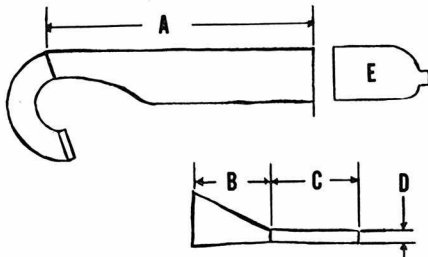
Performance of F6 Enduro models may be improved by modifying the standard exhaust pipe.
